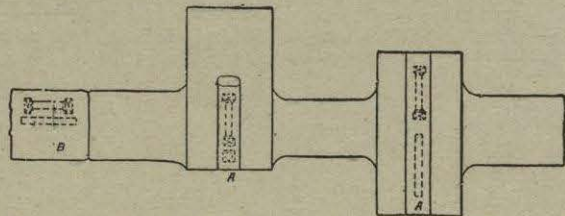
Crank Axle, showing Position from which Tensile Test Pieces are usually Slotted.
